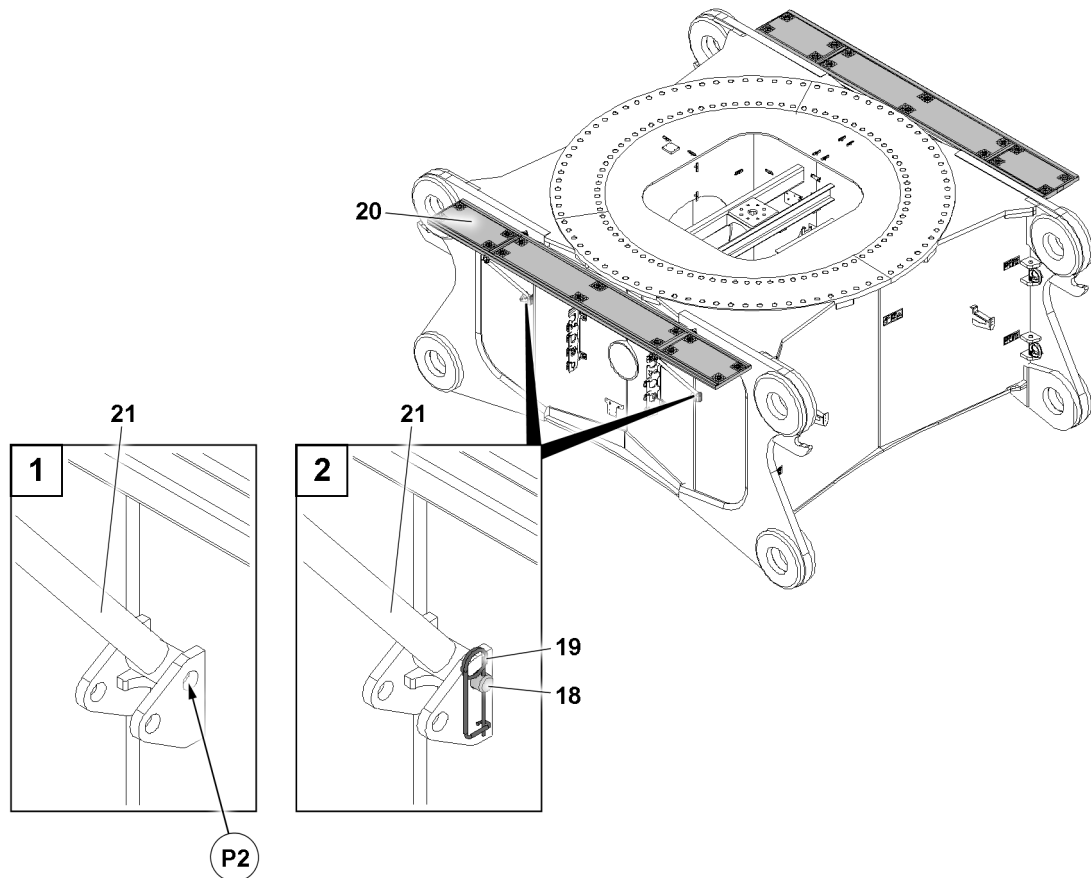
Assembling the grating on the crawler center section in the operating position — assembling the supports
